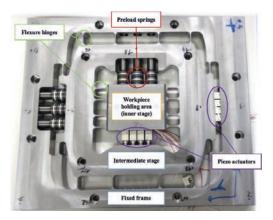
Active fixture prototype (external dimensions 343x289x20mm).
